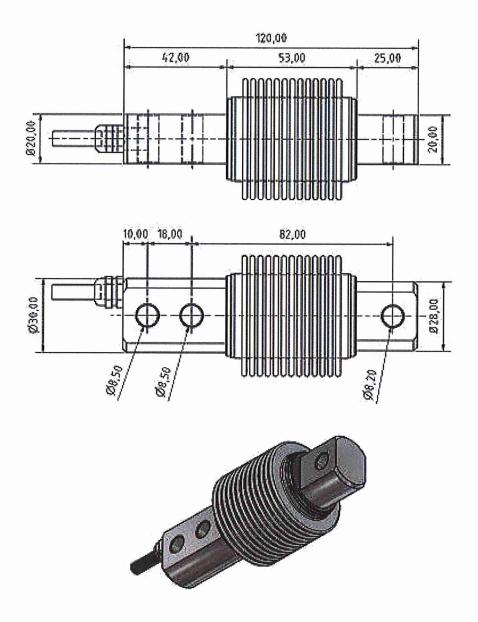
Drawing gs2-2\_1a: dimensions load cell version GS-2-1A.
